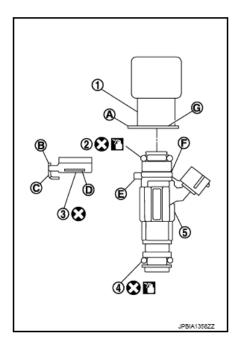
Disassembled View Of Fuel Injector Courtesy of NISSAN MOTOR CO., U.S.A.
